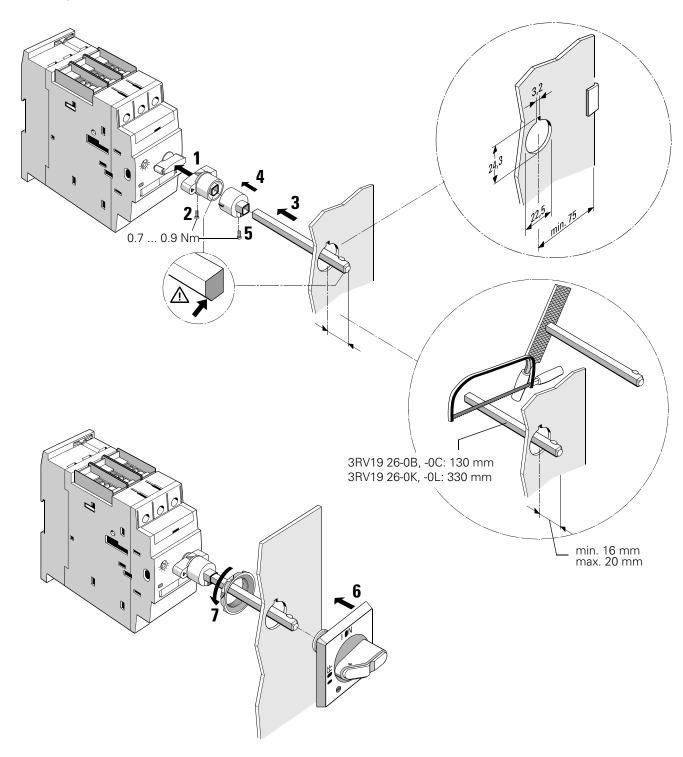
Mounting the thru-the-door rotary operator 3RV19 26-0., (example: Frame size S2)
